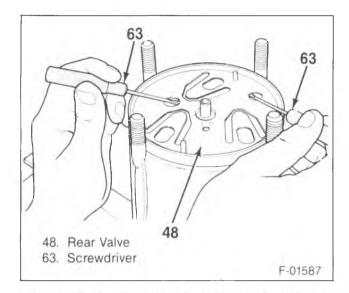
Removing the Rear Discharge Valve Plate and Seal
